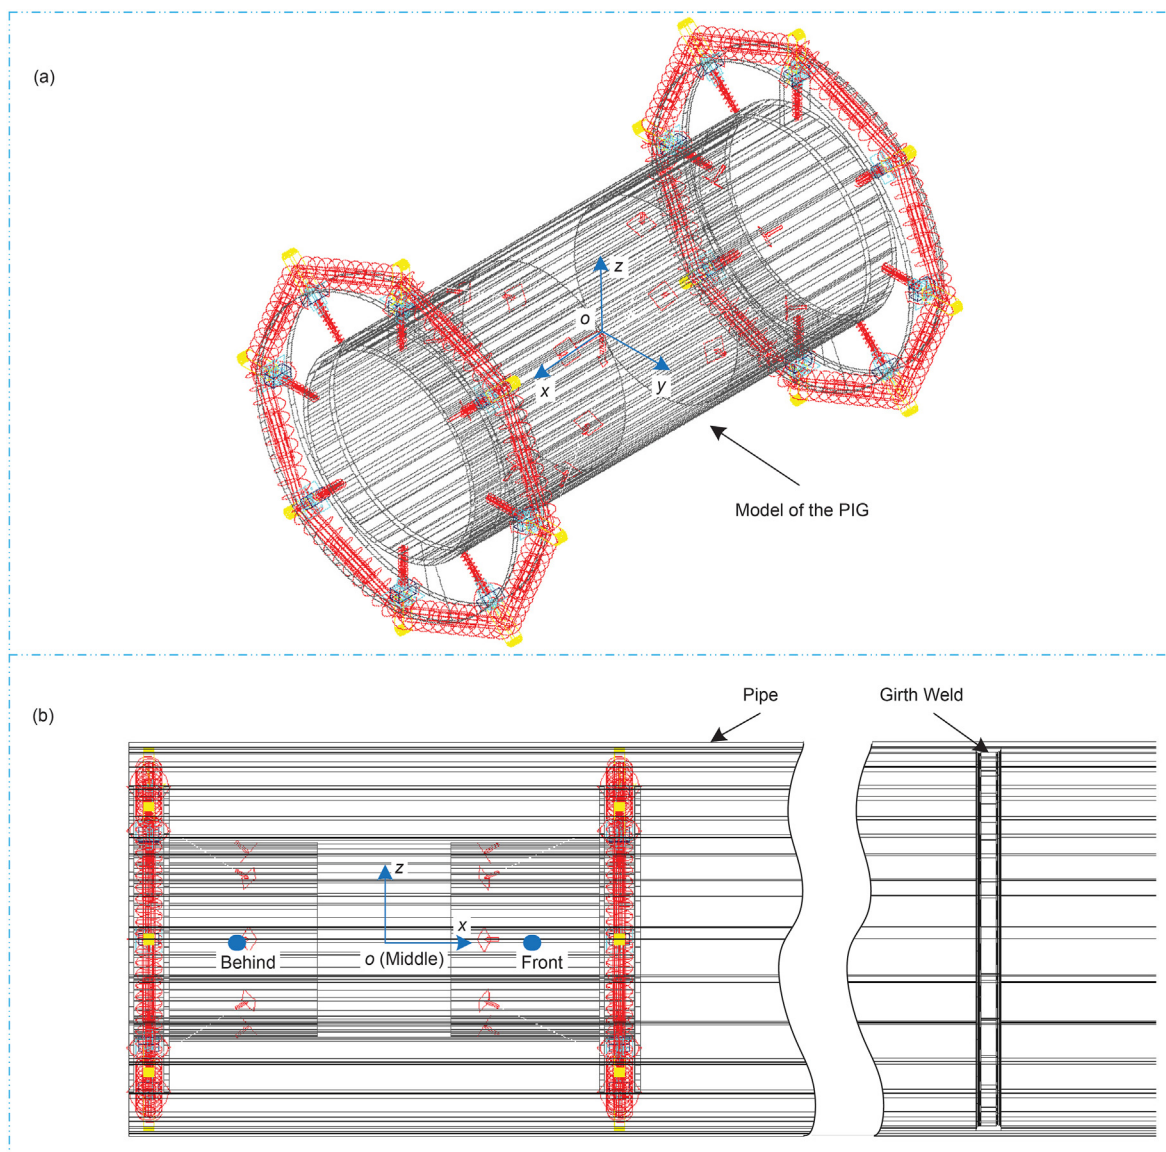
a PIG model in ADAMS; b PIG model and the pipe system containing the girth weld.
